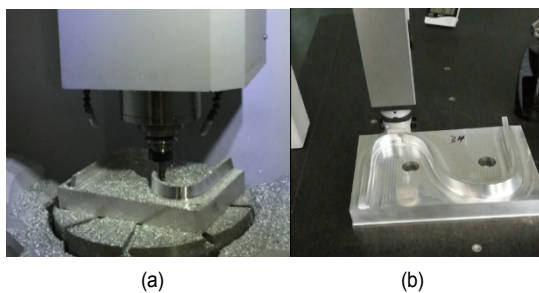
(a) Machining test set up; (b) measuring workpiece accuracy.
